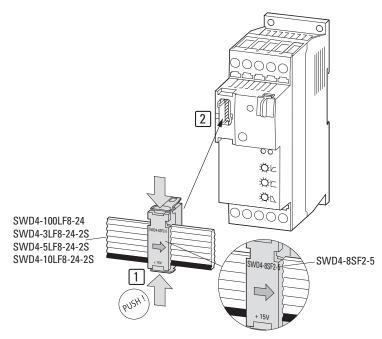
Connecting the SmartWire-DT external device plug with the adapted ribbon cable
